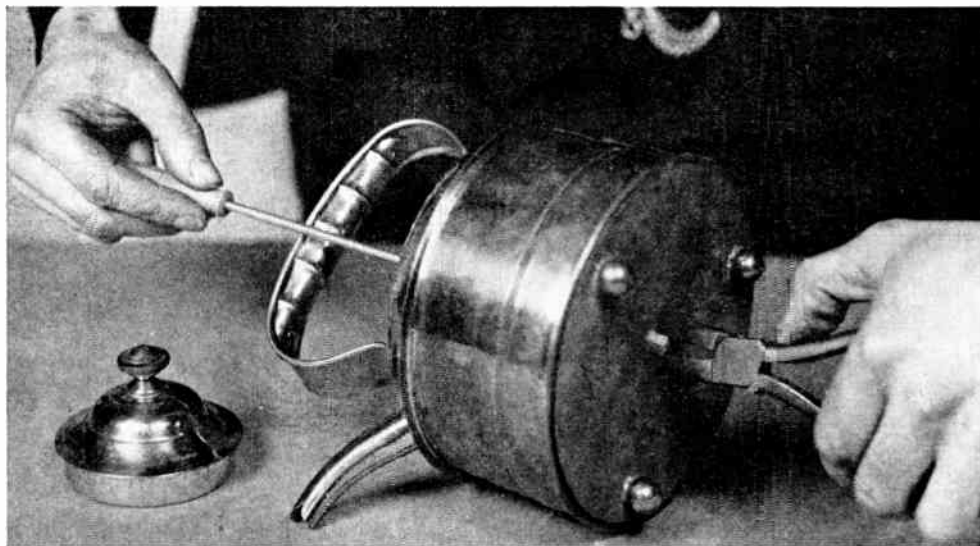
ASSEMBLING THE COMPONENTS OF THE ELECTRIC KETTLE.
